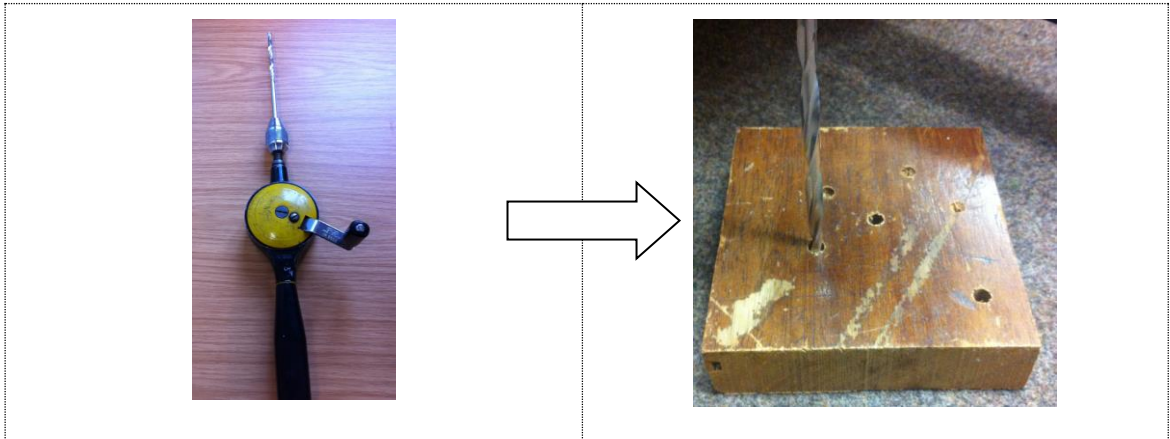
A manual drill with 6 mm drill bit; drilling holes in hardwood
